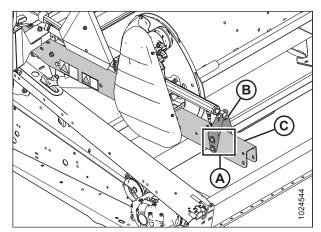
Right Reel Arm Cylinder in Aft Position
